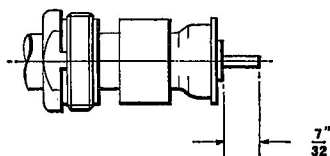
C—Assembly instructions—C Type plugs and sockets—UK cable clamp
